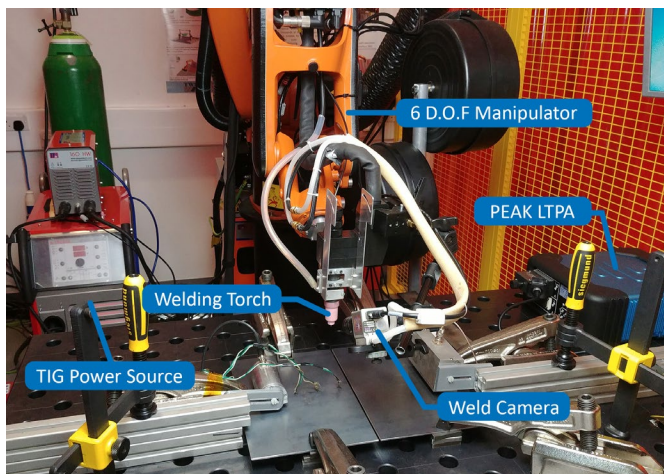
Flexible welding and NDE cell showing TIG Power Source, Welding Torch, Weld Camera, 6 D.O.F Industrial Manipulator and PEAK LTPA phased array controller.
